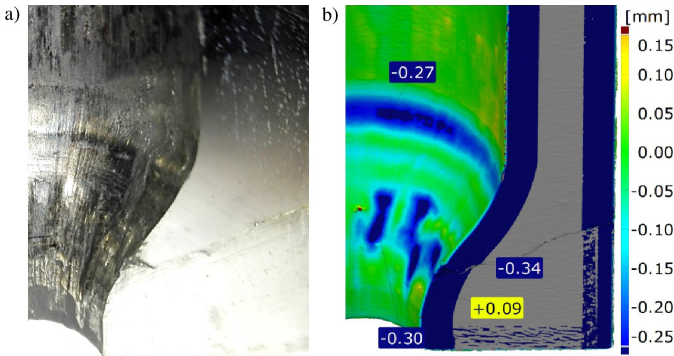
The tool surface after 1900 working cycles: a) macro view, b) comparison of laser scan image with CAD model
